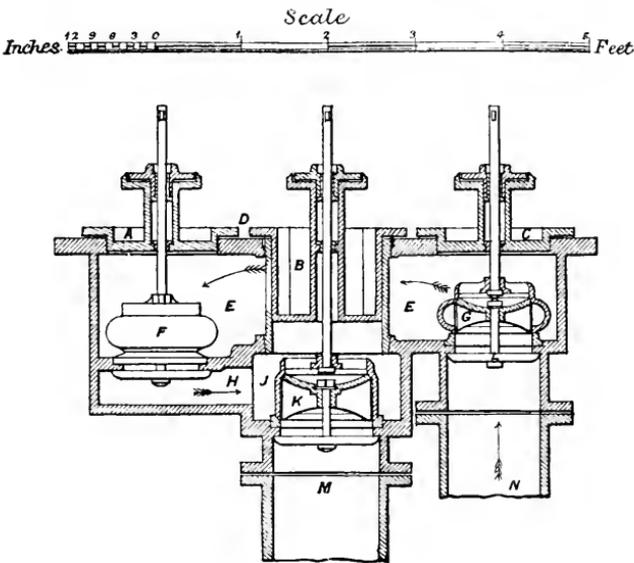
ENLARGED VIEW OF THE GOVERNOR VALVE.
